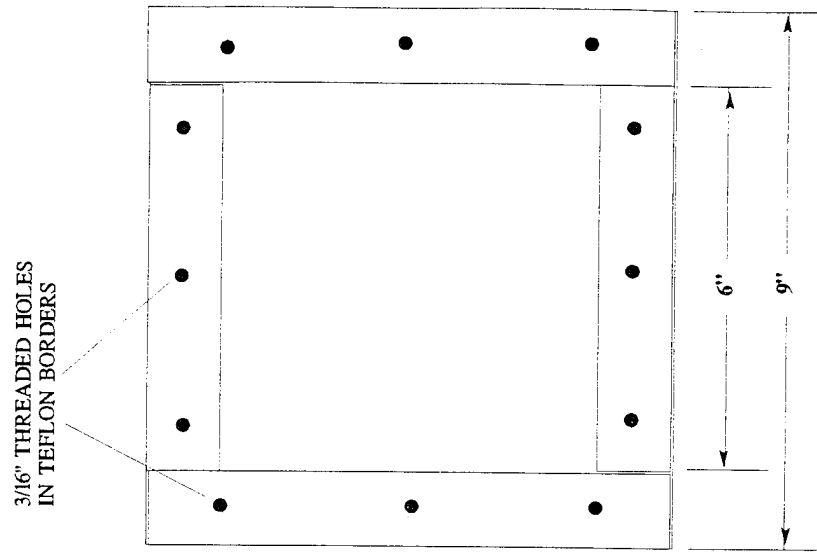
SPATULA FILLER SAMPLE MOLD
